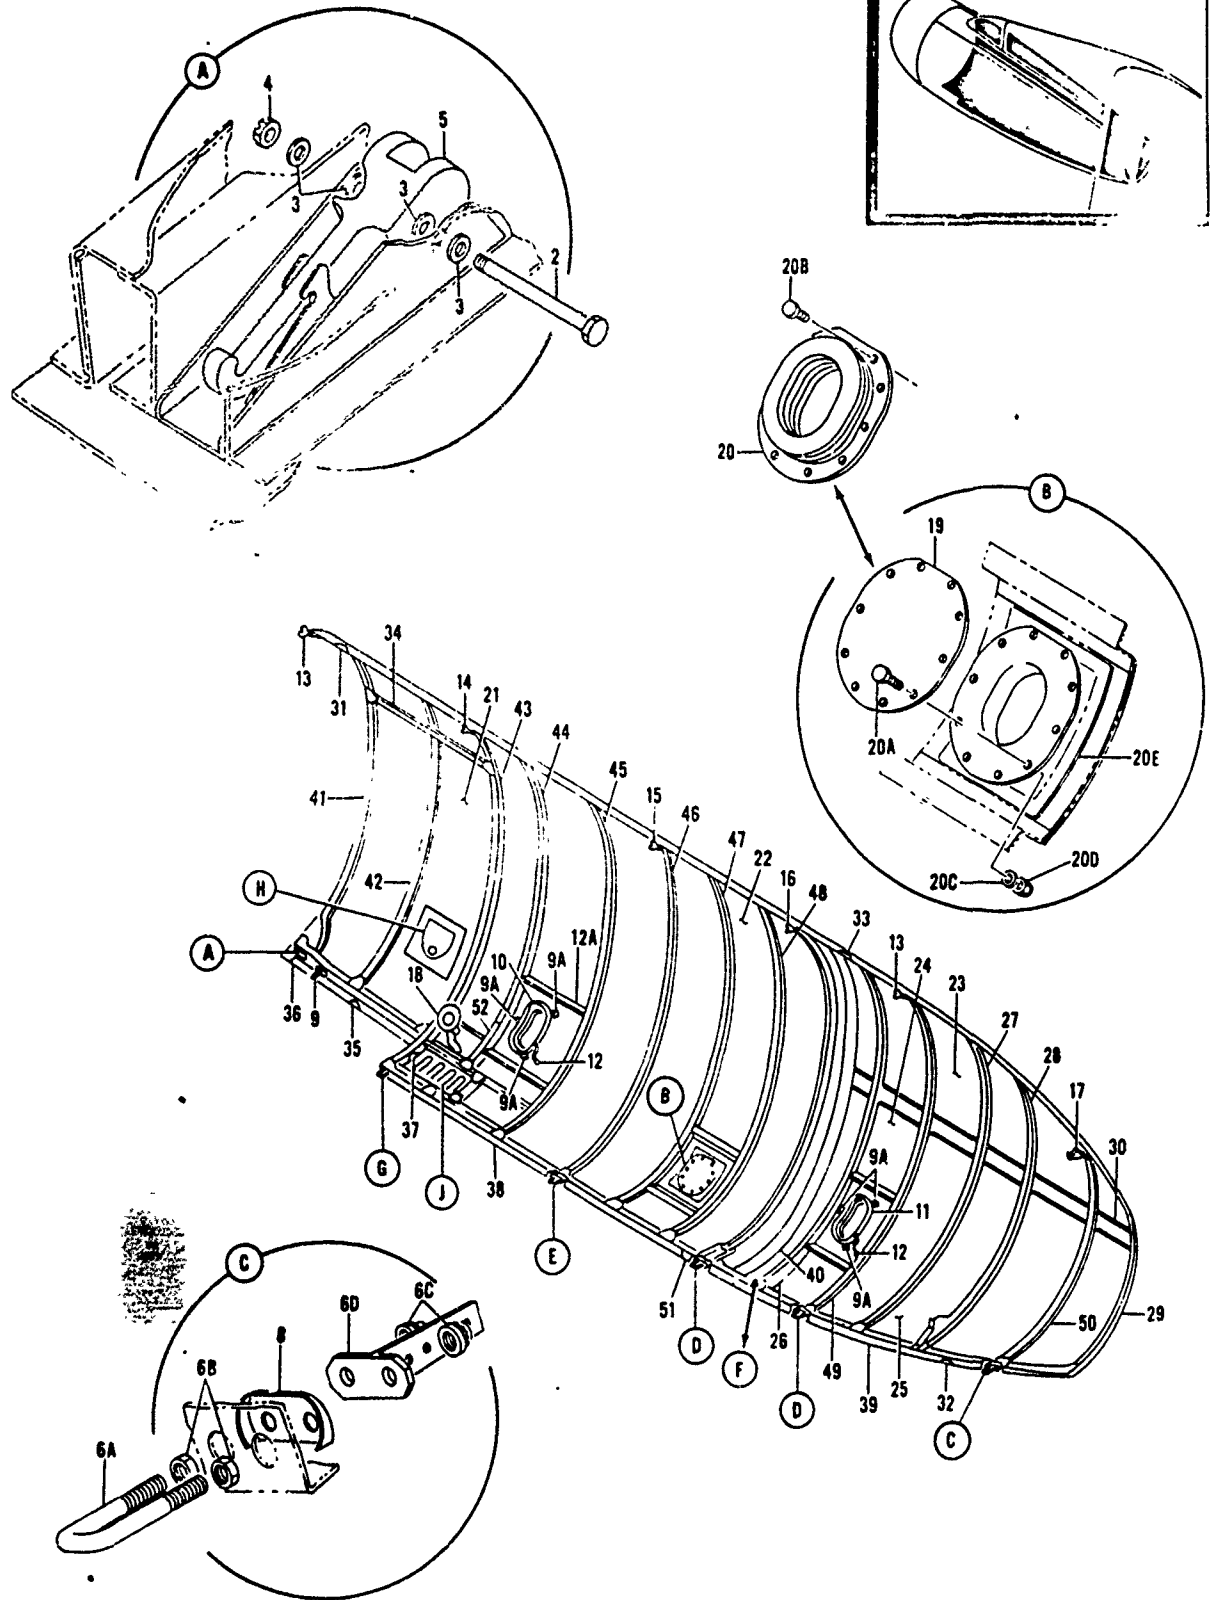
Engine Nacelle Right-Hand Side Cowl Panel Assembly (Sheet 1 of 2)
